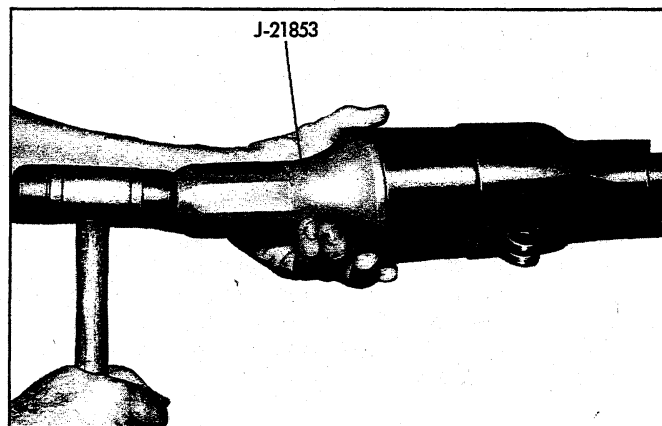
Installing Turn Signal Switch Cover Using Signal Switch Installer Tool J-21853
